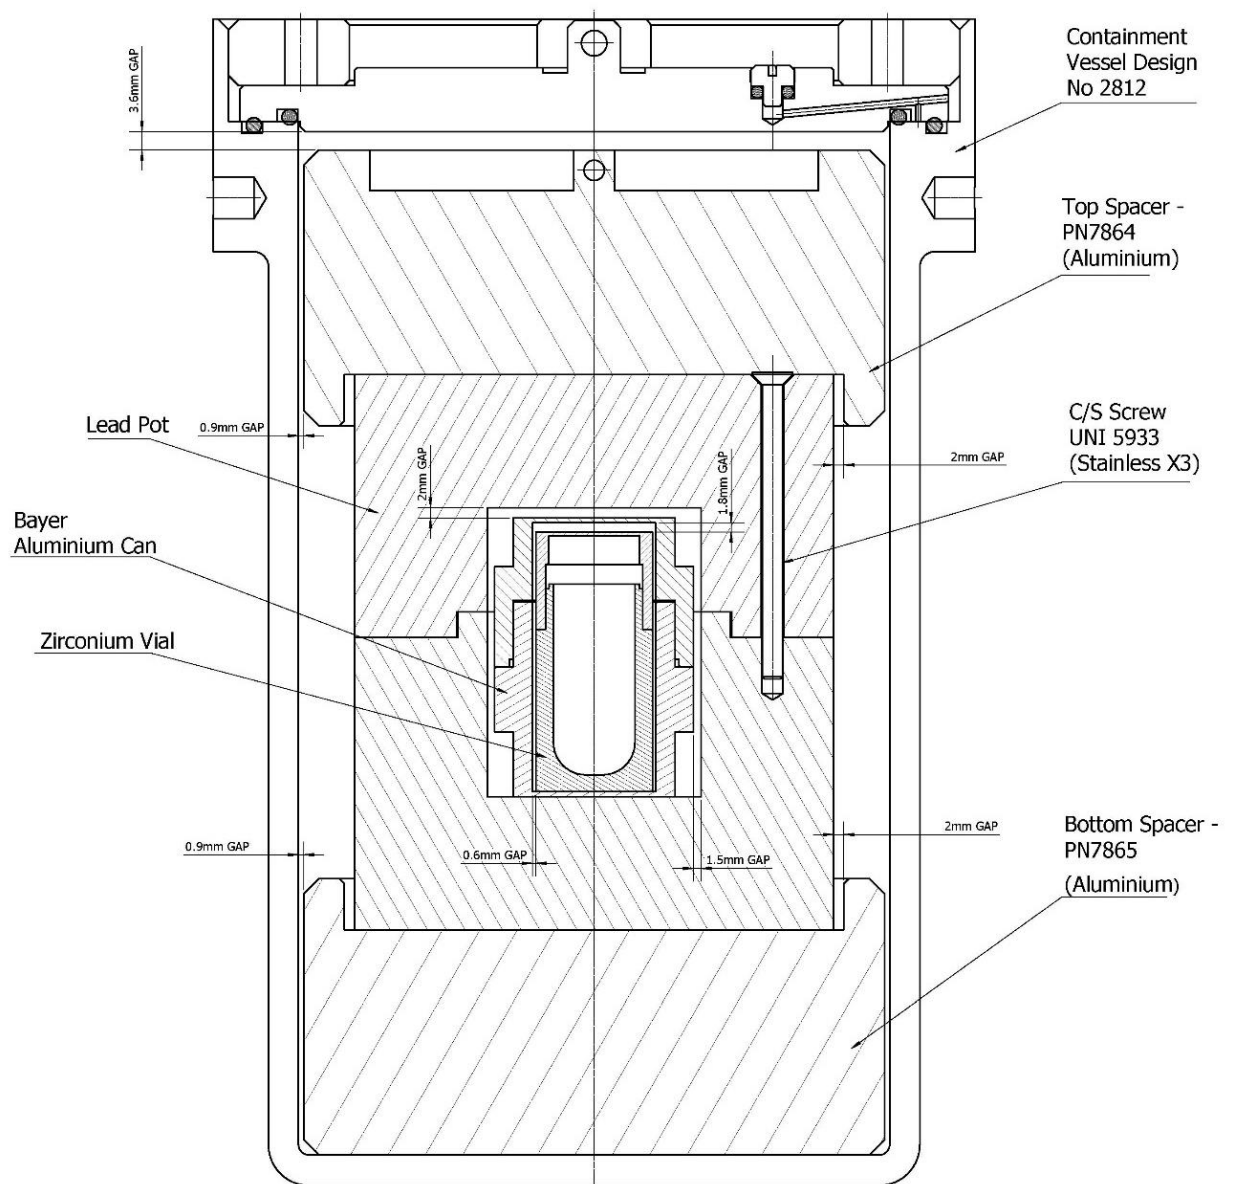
INNERMOST PACKAGING ARRANGEMENT 3
